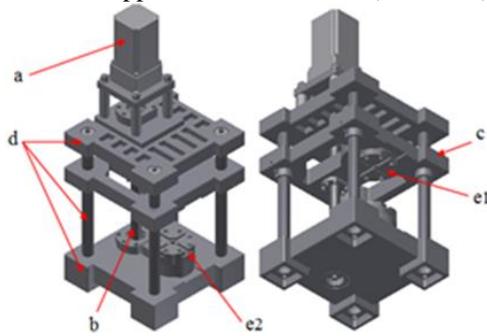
3D model and detailed drawing of μ -Forming machine 5kN. Sub-Function of micro forming machine; a). Servo motor, b). Ball screw, c). ram, d). Frame and guiding set, e). Bolster.
